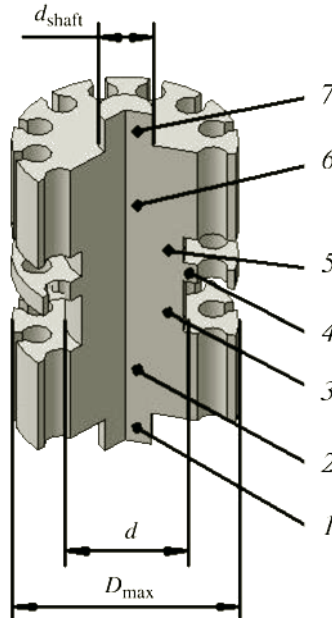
Schematic of typical molding rotor: 1) lower support; 2) lower drum; 3) intermediate shaft; 4) die plate; 5) intermediate shaft; 6) upper drum; 7) upper support.
